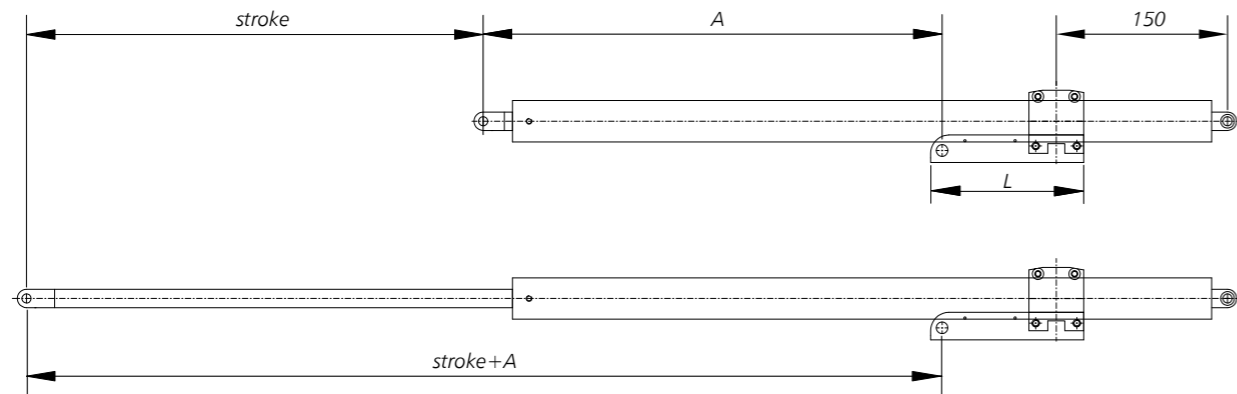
Dimensions of type S spindle electric actuator with shifted pivot point [mm]
